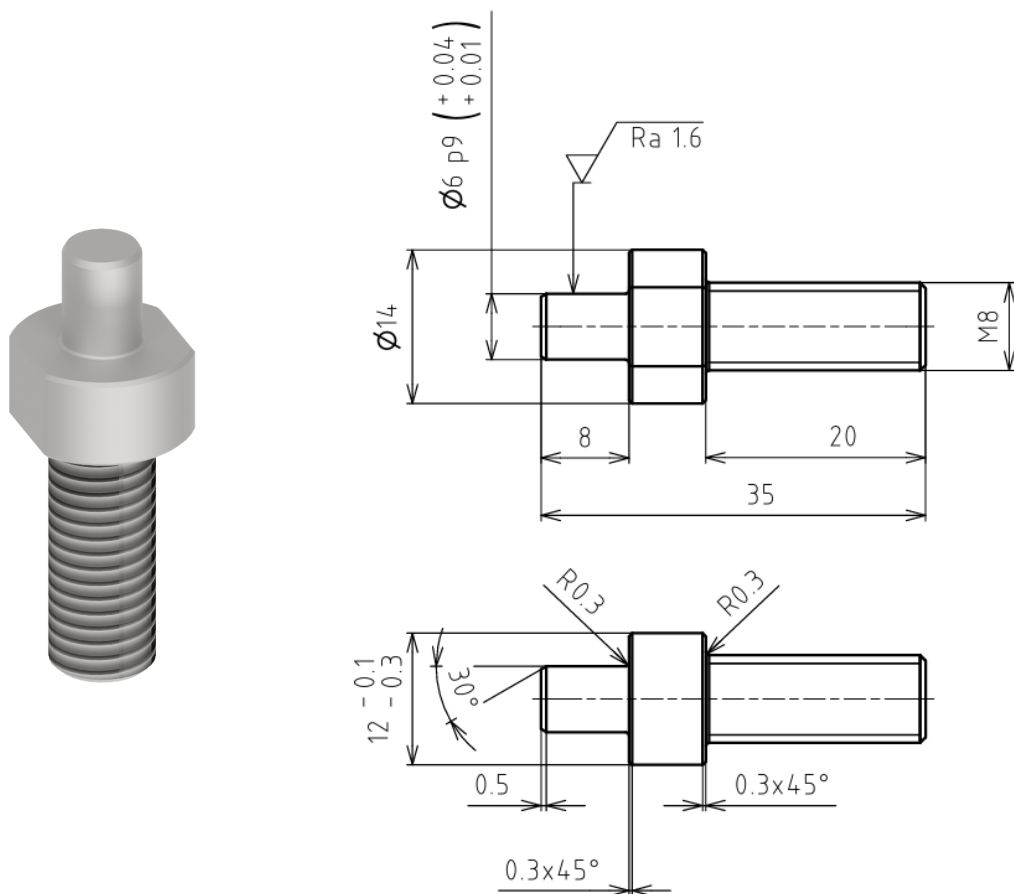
Bolt to connect the joint and load cell (dimensions in mm)
